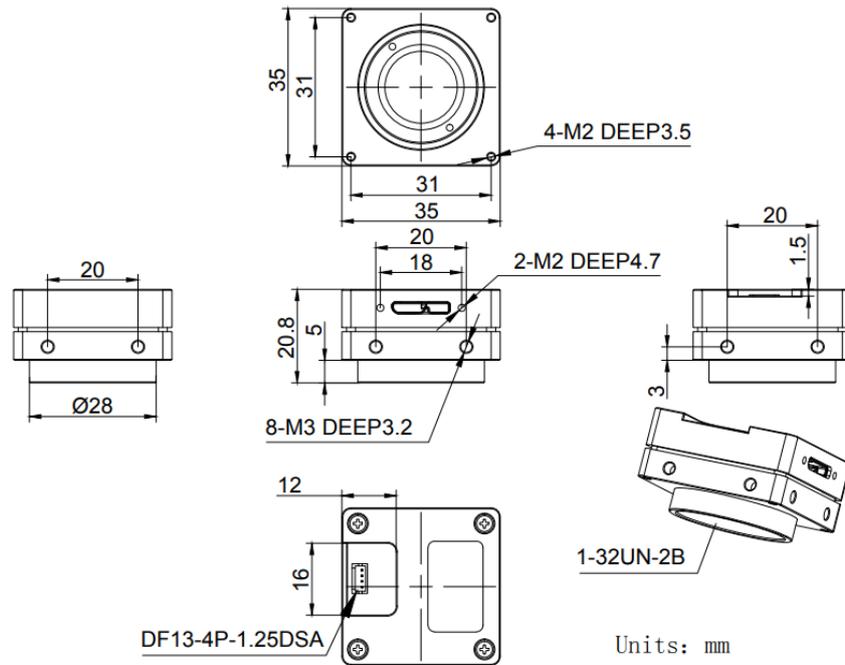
All-in-one USB3.0 camera mechanical dimensions (CS-Mount)
